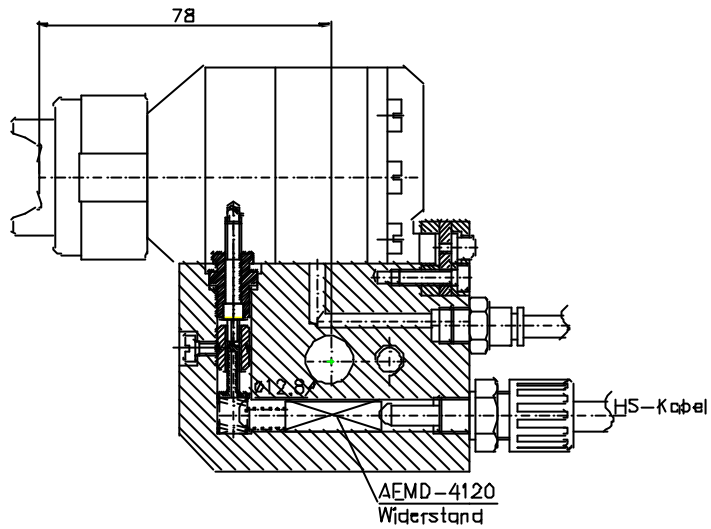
Assembly plate for adapter AEMD 4000 for robot
